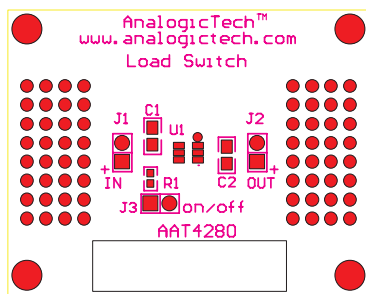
Evaluation board top side silk screen layout / assembly drawing
